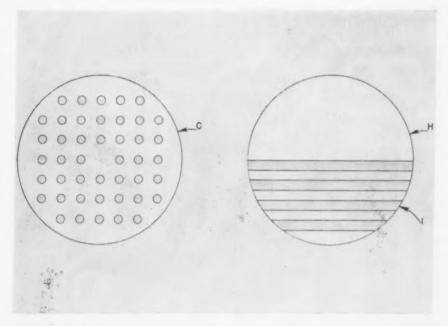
(Left) Faceplate having series of drilled and tapped holes for work-clamping purposes. (Right) Faceplate having series of keyways for accommodating key stock for clamping work.
